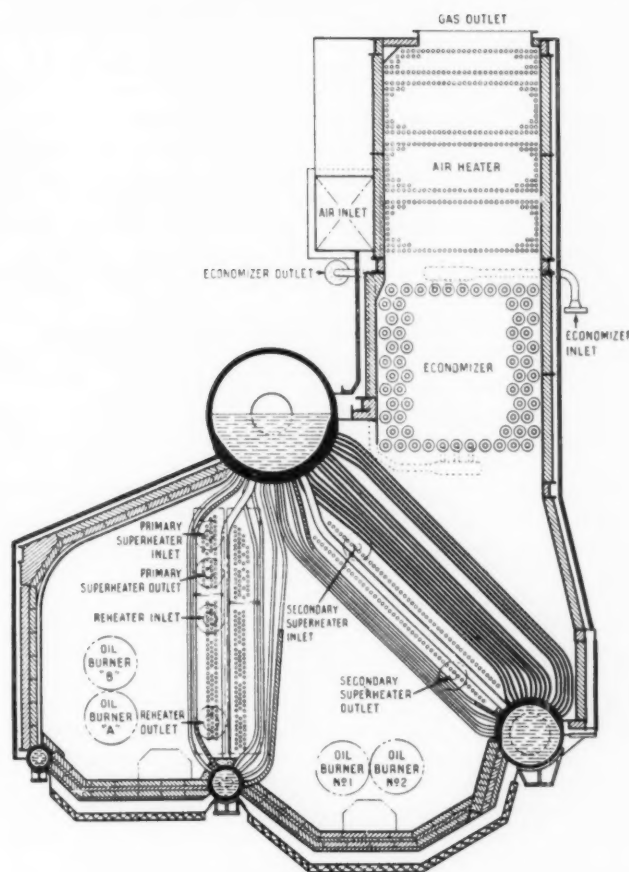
FRONT-VIEW SECTION OF 2-FURNACE SINGLE-UP TAKE HIGH-PRESSURE REHEAT BOILER WITH ECONOMIZER AND AIR HEATER
